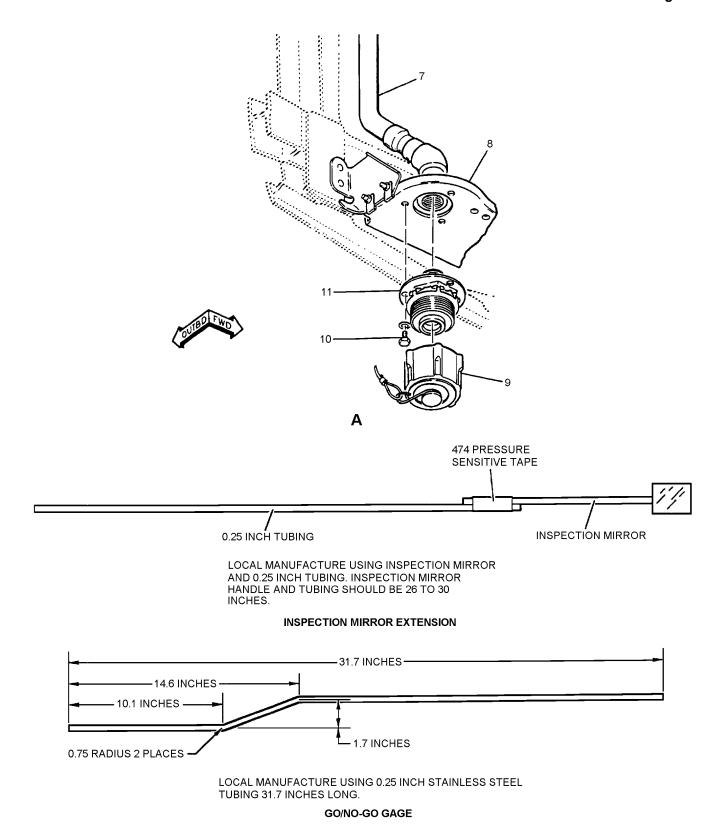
Fuel/Air Heat Exchanger Manifold (Sheet 2)
